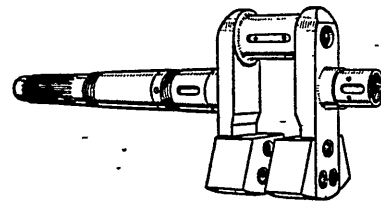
ONE-PIECE SINGLE-THROW CRANKSHAFT.
